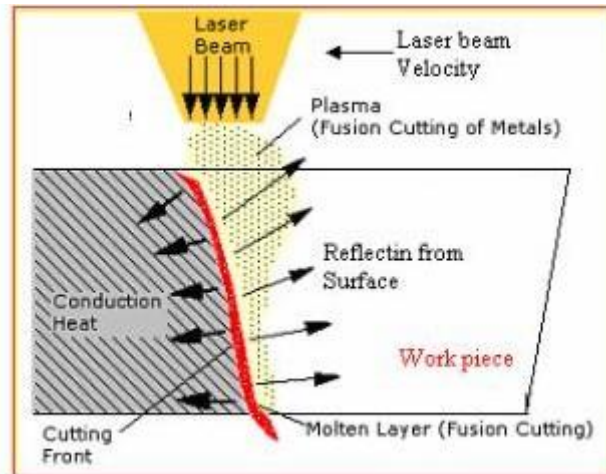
Laser cutting is a procedure that involves the cutting of materials.
